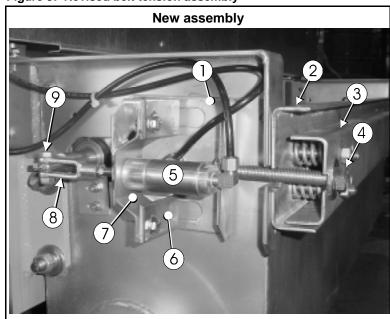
Install belt tension support & bar, hex tap screw & captive nut and air cylinder mounting bracket
